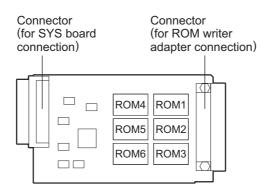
Jig board: PWA-DWNLD-350-JIG2 (48 MB)
